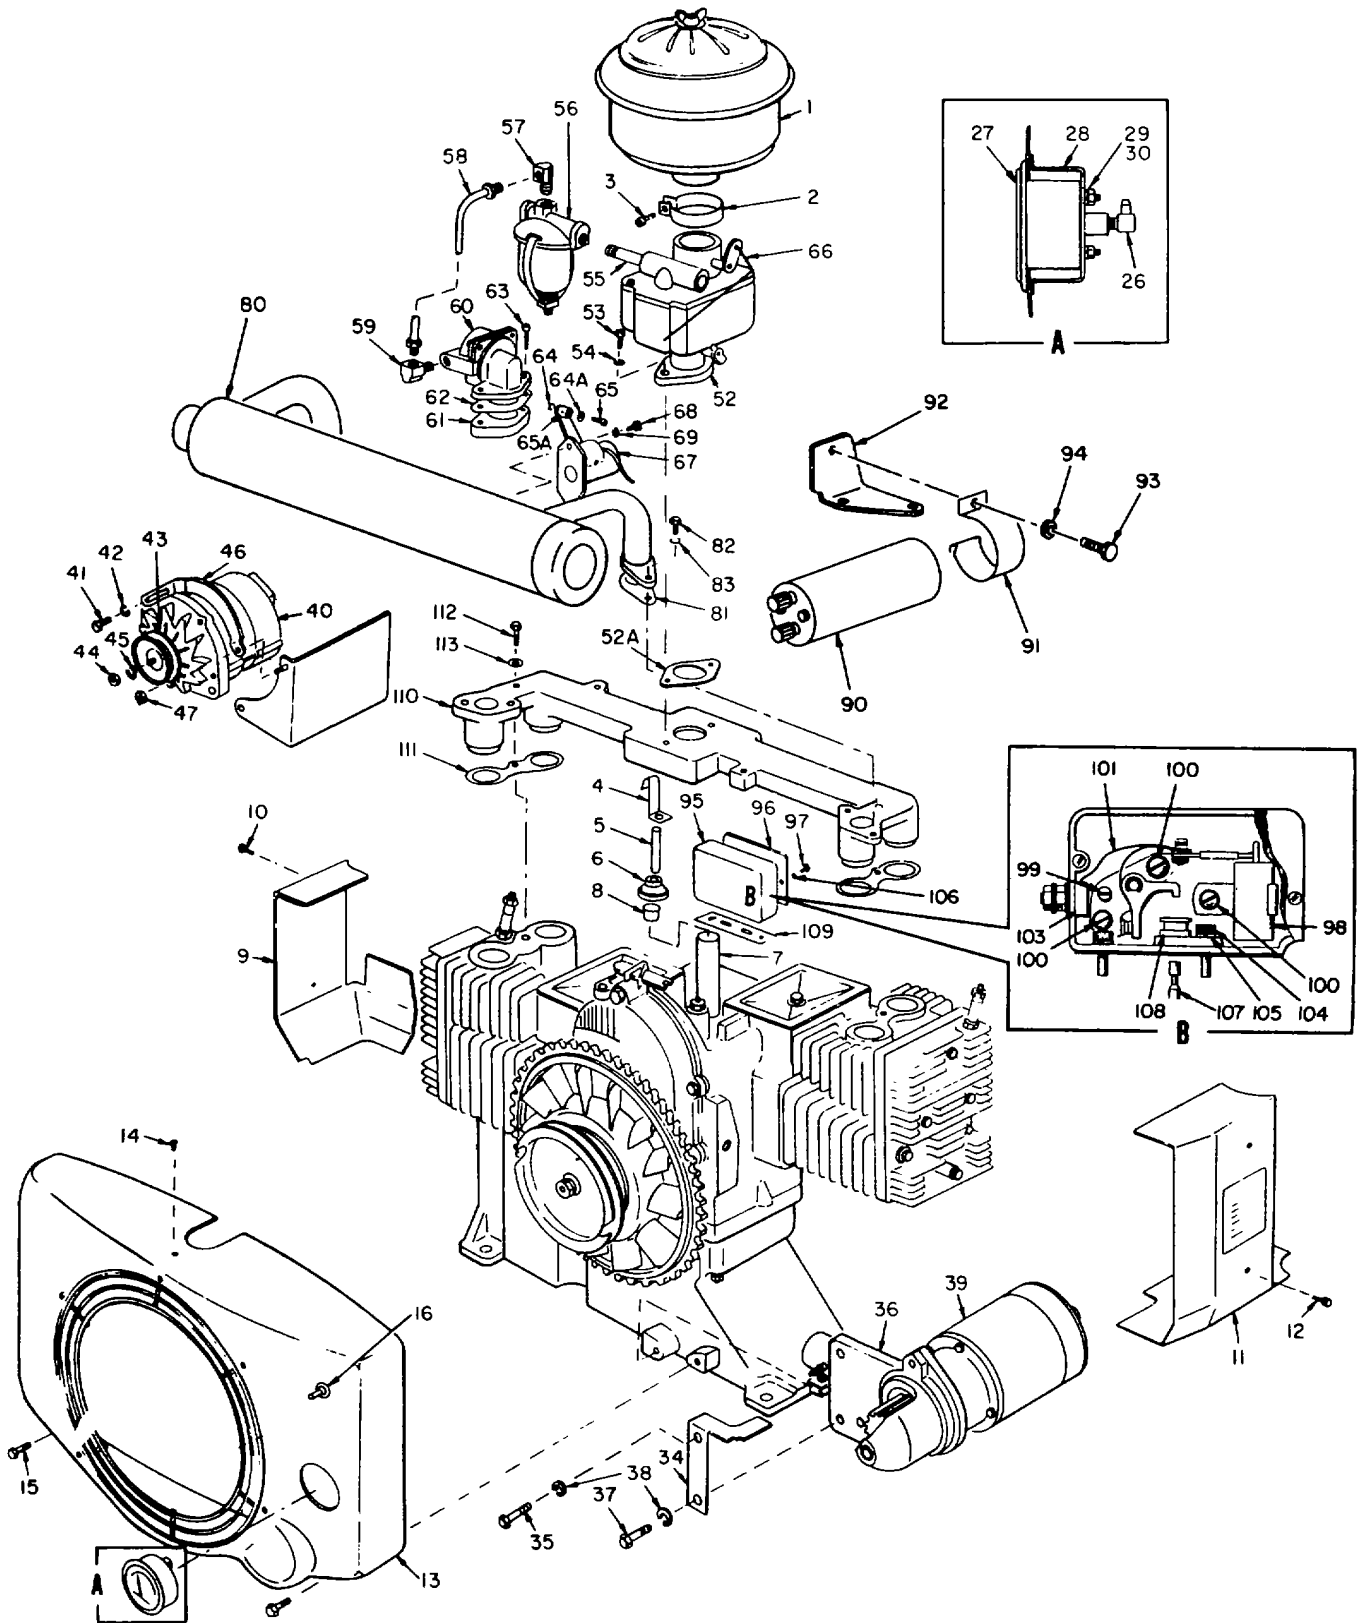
Engine Exploded View (Sheet 1 of 4)
